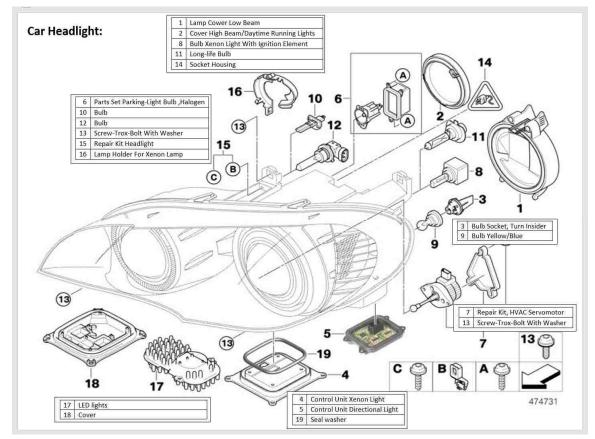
Exploded view of Car Headlight (workshop-manuals.com)
